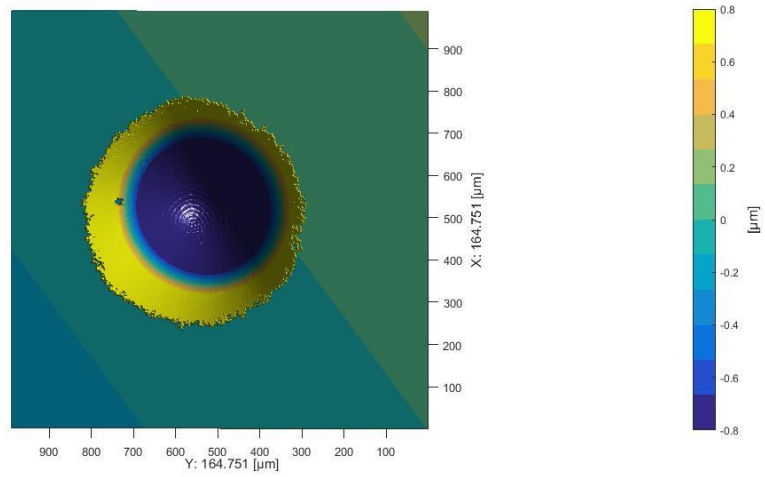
Shape of the glass (CuZnPb side) after molding
